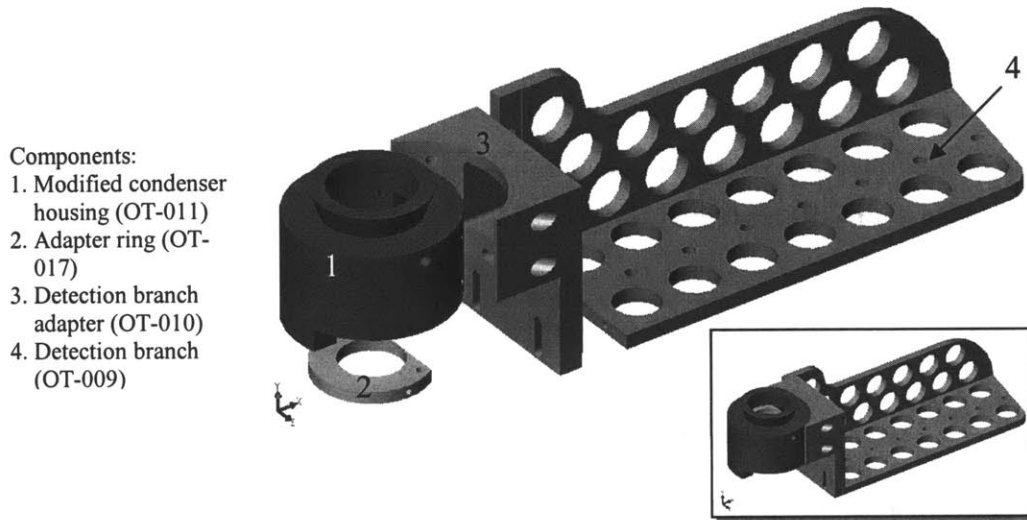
Condenser housing modification and detection branch (exploded view). *Inset:* assembly view
